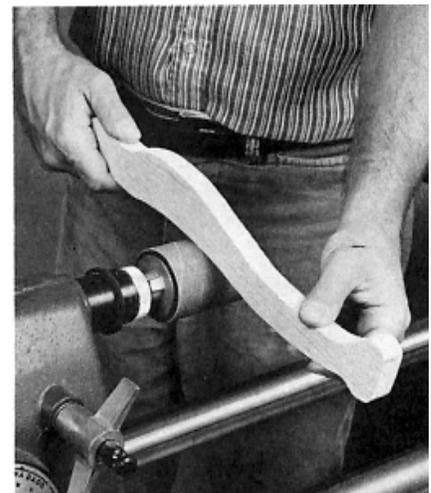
The drum sander is used to smooth surfaces of elaborately contoured projects like the cabriole leg.
